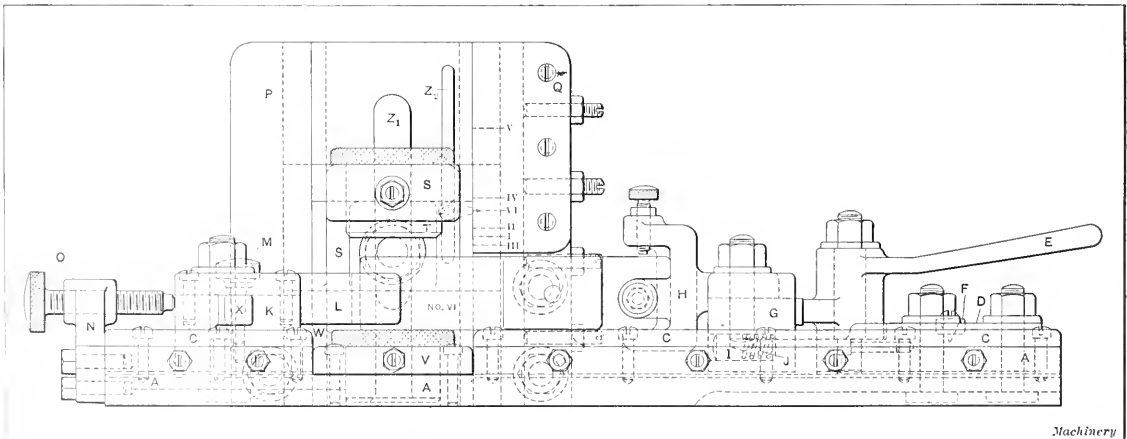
Front View of the Jig showing Bushings and Drill Guide Supports
